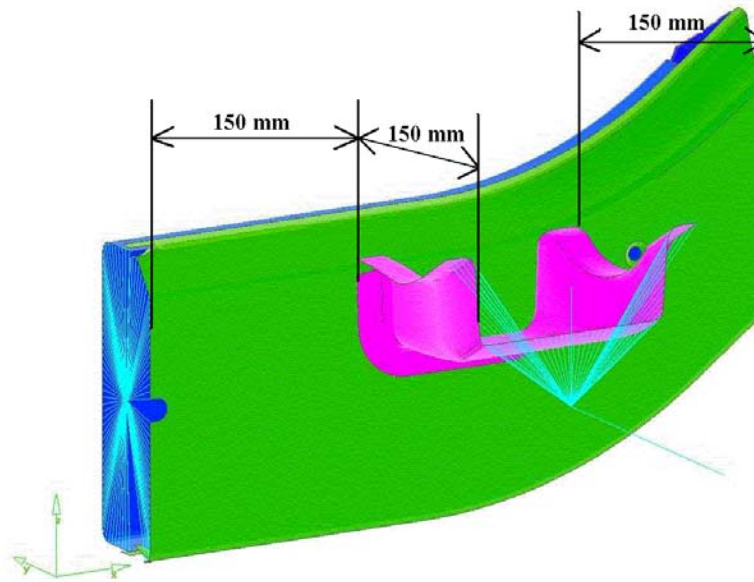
Joint 5: Hat Section to Box Section (welded around outer flange perimeter only)
